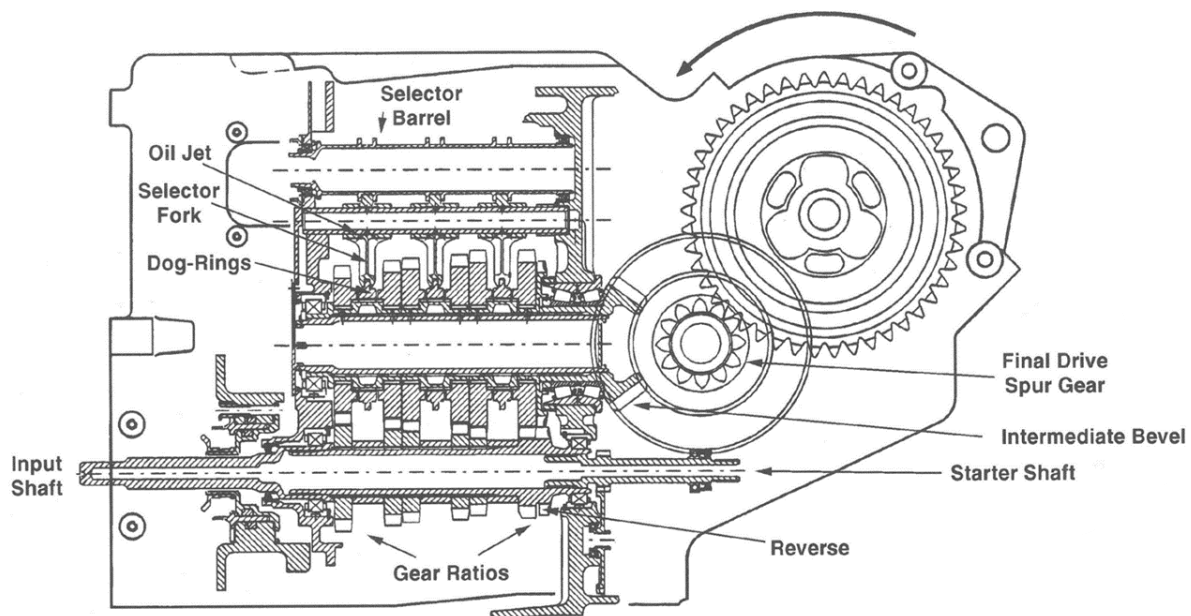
Technical schematic of a high end race gearbox (Clarke, 2017)
